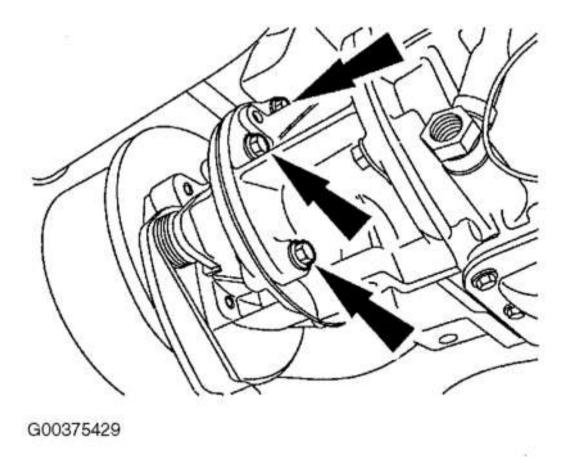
Locating Parking Brake-To-Transmission Bolts Courtesy of FORD MOTOR CO.
